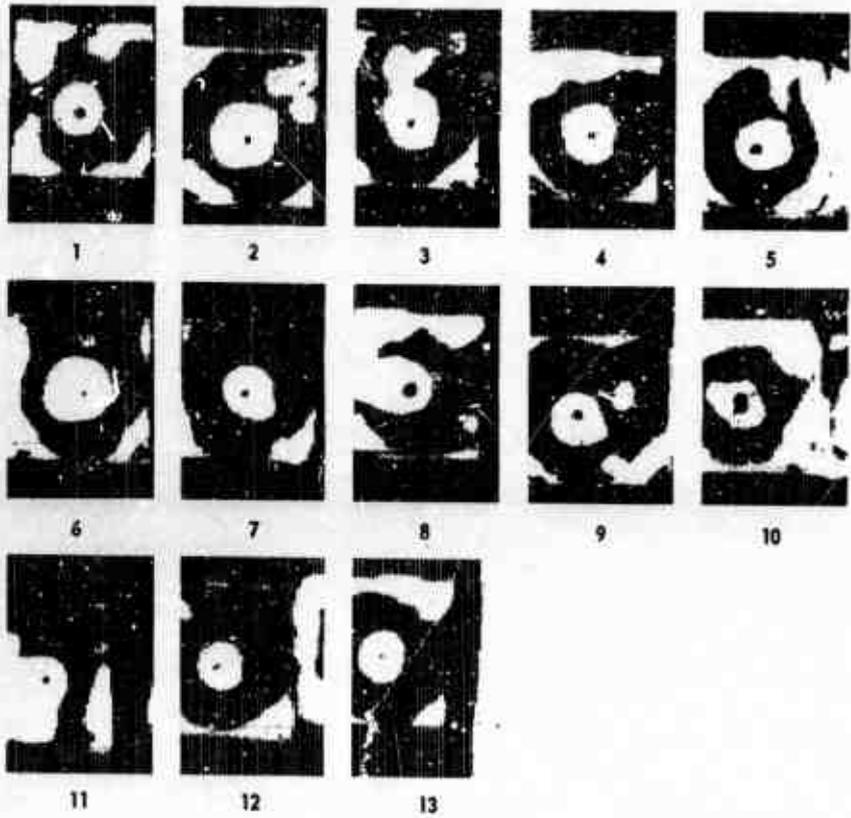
C-Scan Record of Series 1 Welds.
